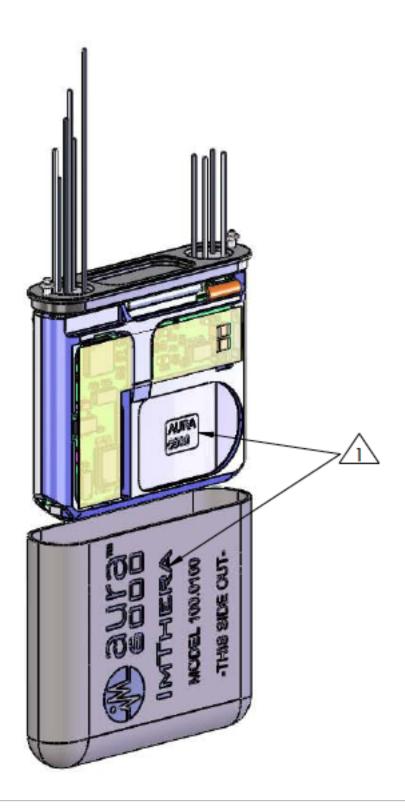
IPG Internal Assembly being inserted into titanium can prior to laser weld of feedthrough assembly to can
